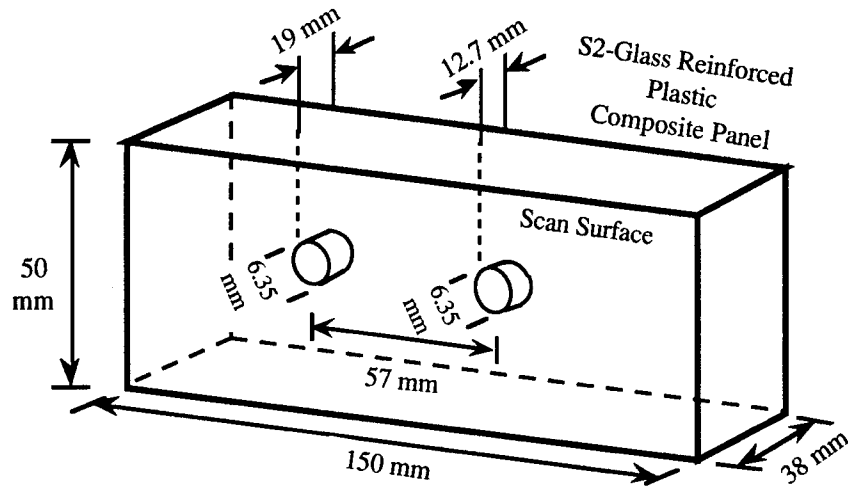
Geometry of a thick composite panel with two flat bottom cylindrical holes cut out of the panel, [8].
